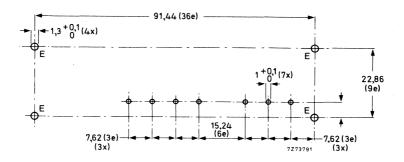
Piercing diagram viewed from solder side of board; e = 2,54 mm (0, 1 in).
